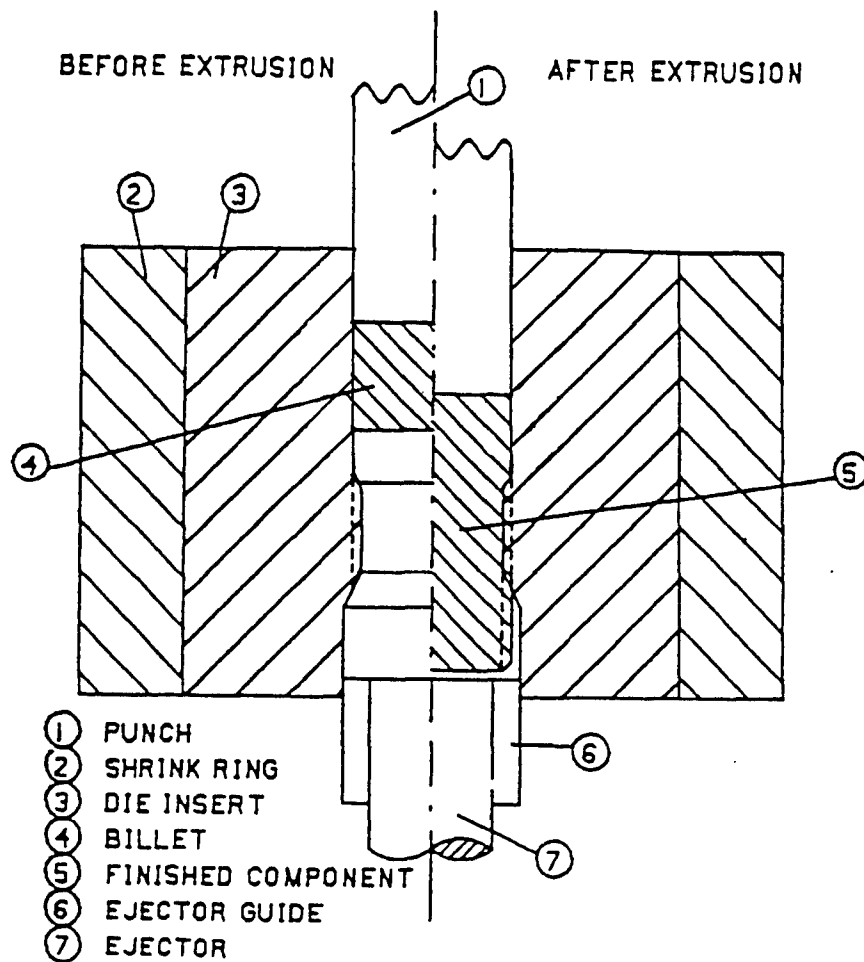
Typical Tool Setup for Extruding Helical Gears
